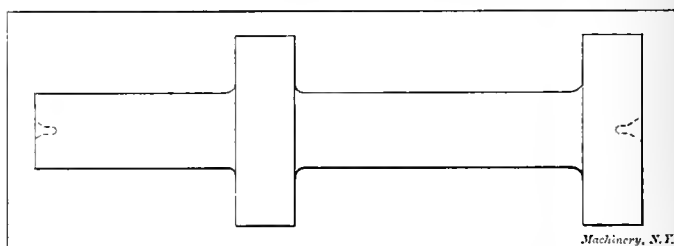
Test Piece used to set Grinder Table Straight, prior to Internal Grinding
